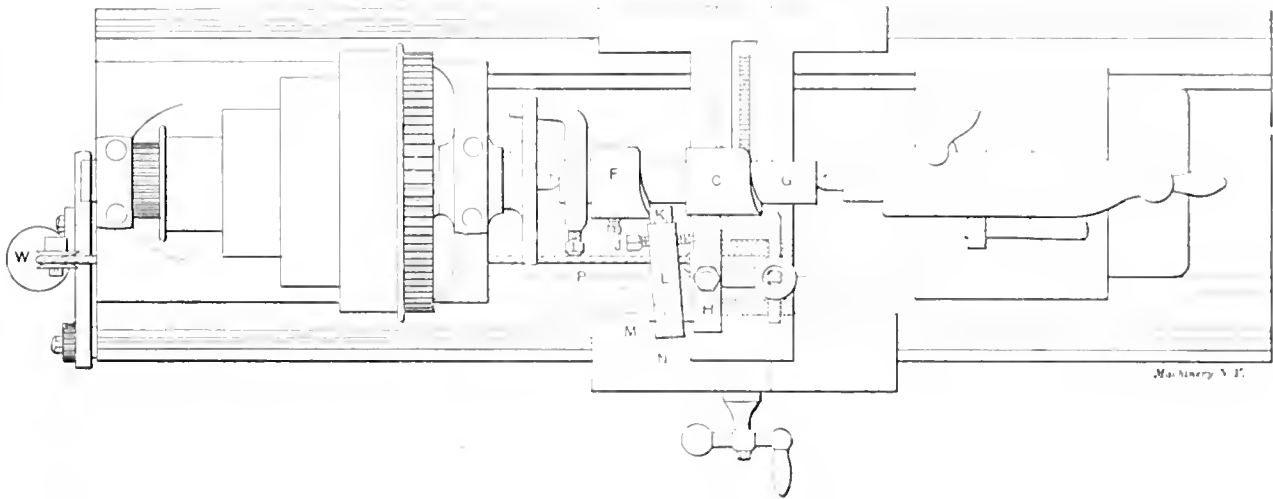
Lathe "Set-up" for Making Formed Cutters.
